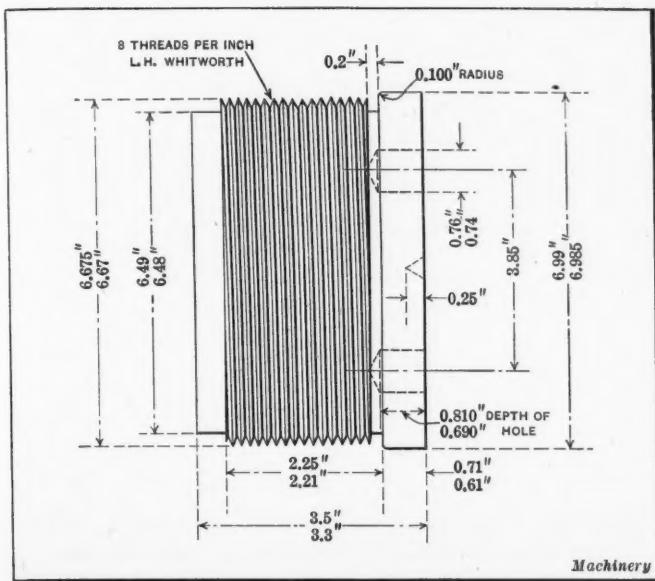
Base Plug for 9.2-inch High-explosive Howitzer Shell
